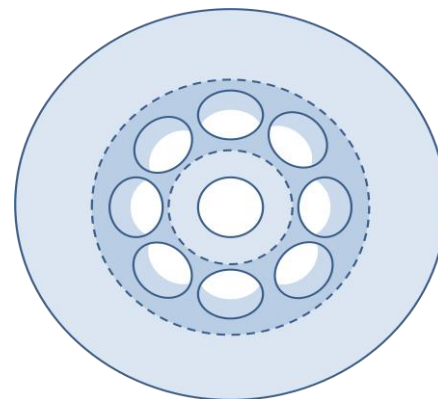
Bottom view of LED holder showing the arrangement of holes where one hole in middle is symmetrically surrounded by 8 holes.
